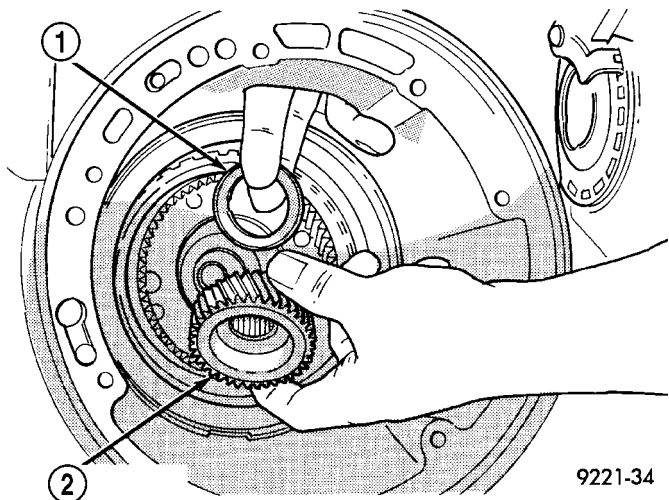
Remove Front Carrier and Rear Annulus Assembly
